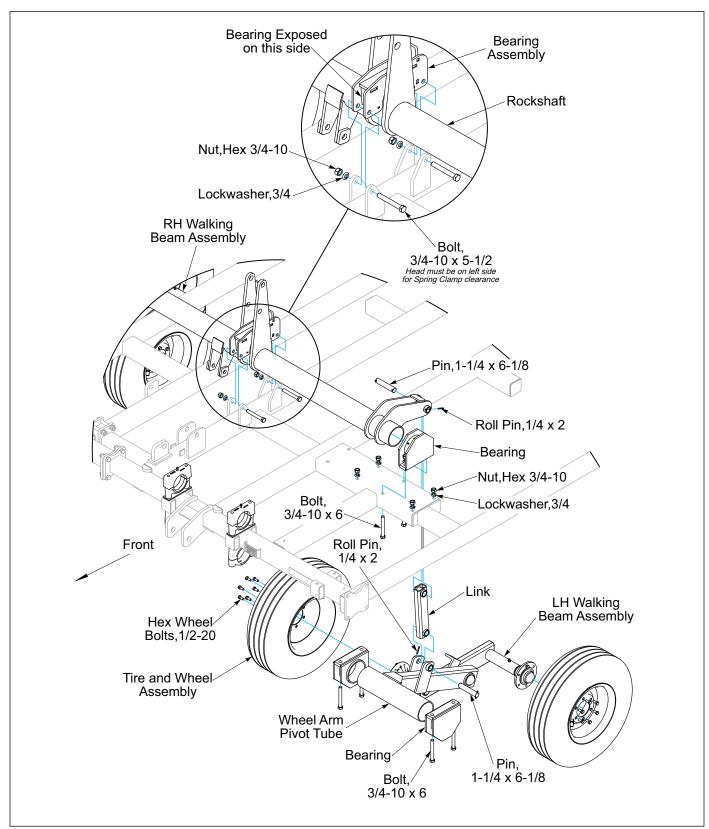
Tandem Wheel Transport Axle Assembly 11 and 13 Shank Models
